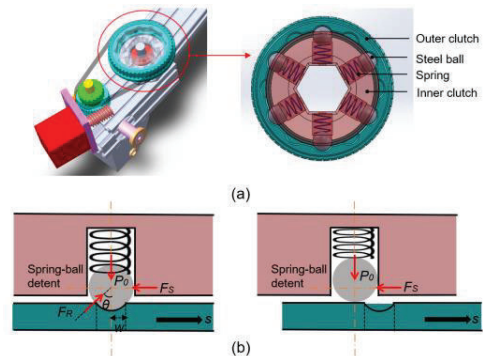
Illustration of the spring-ball based mechanical clutch: (a) design of the clutch joint and (b) the explanation of the disengage mechanism.
